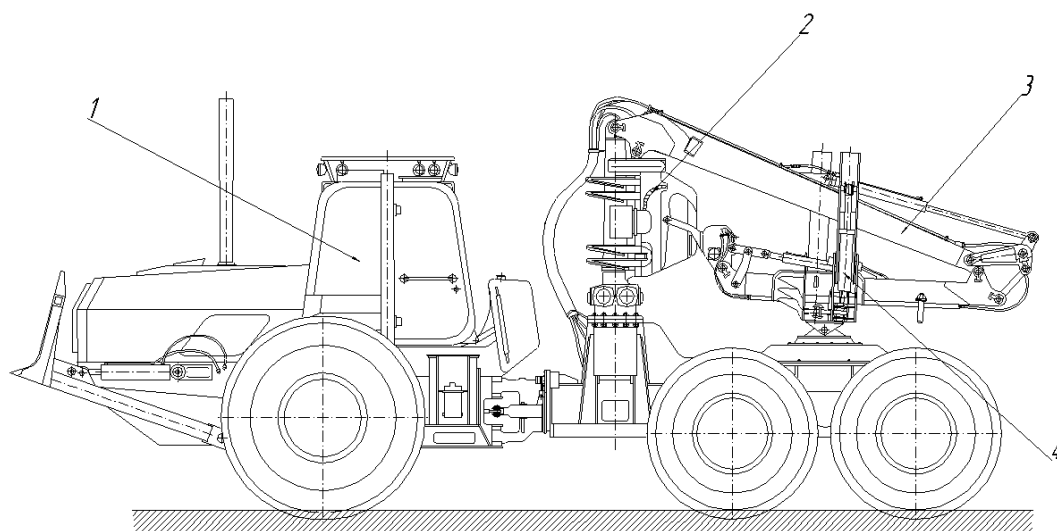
Felling-skidding-processing machine HIGHLANDER HL20-2
